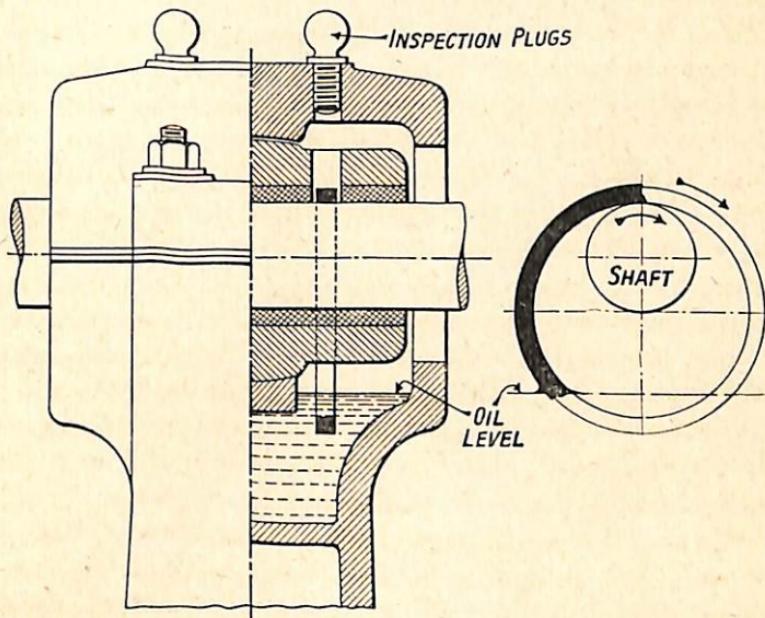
Part section of pedestal sleeve bearing, showing action of oil ring
